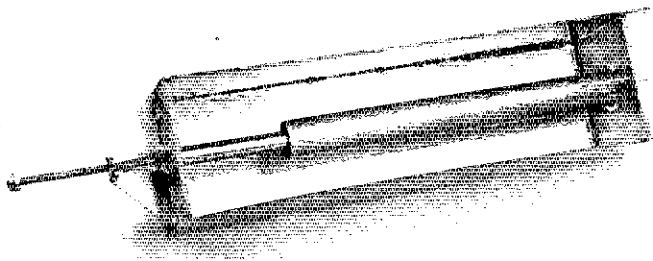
Final assembly of a single cavity. Tack-solder the side plates to the end plates and carefully check alignment of the tubes prior to soldering the seams full length. After all seams are fully sealed, lay the final side in place and solder all seams.
